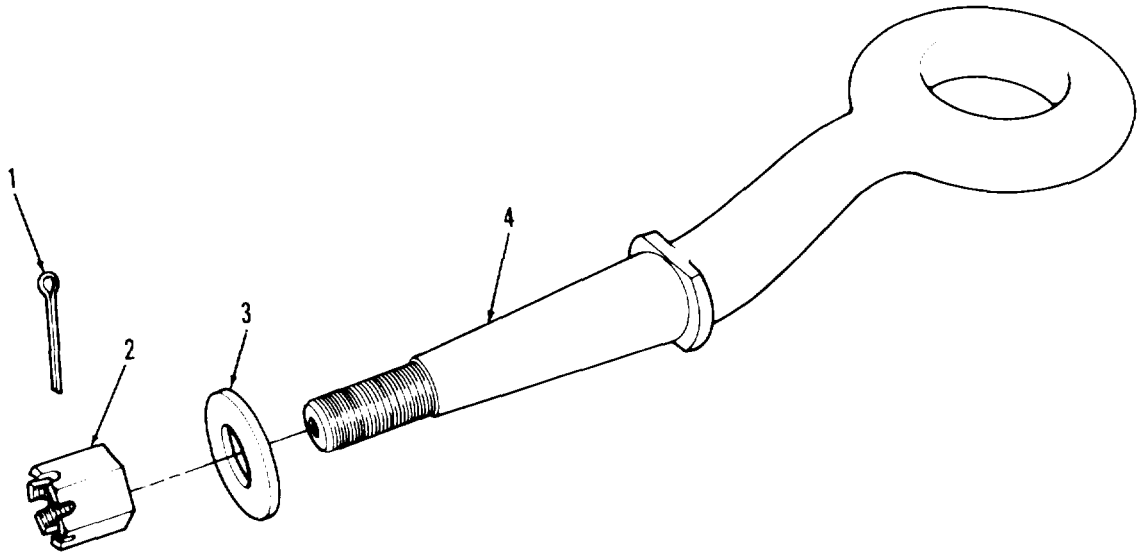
DRAWBAR COUPLER AND ATTACHING HARDWARE.
